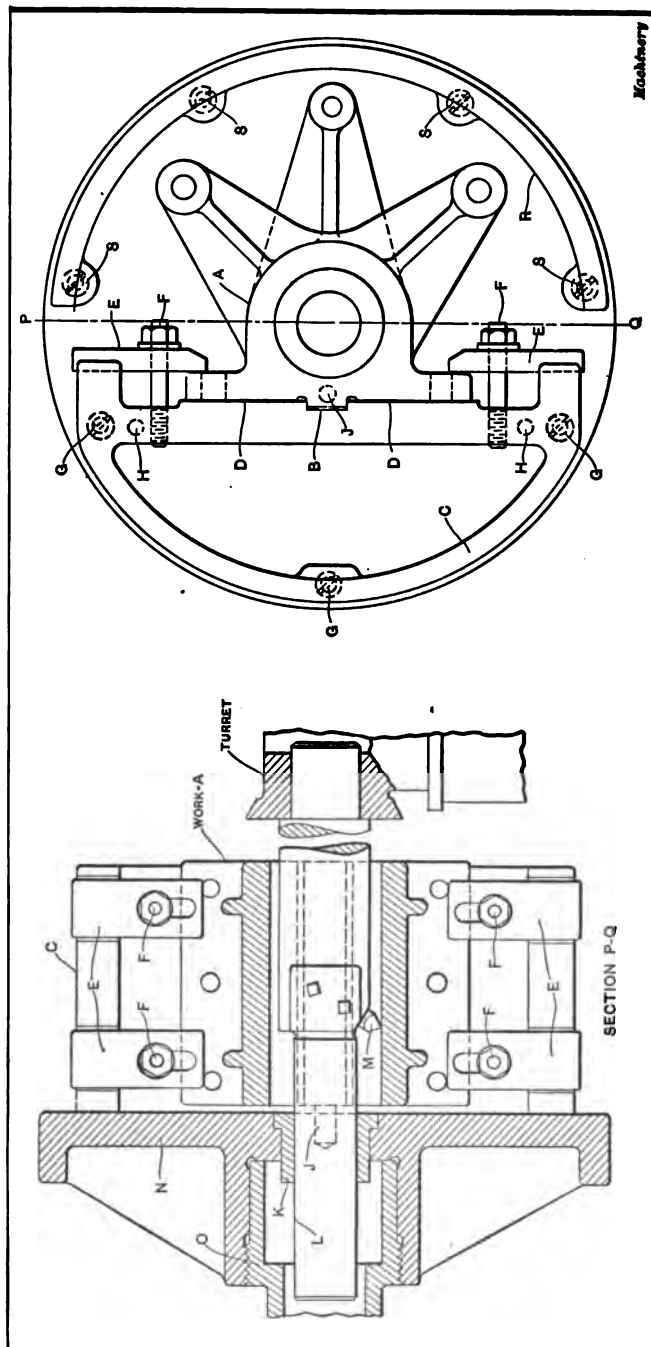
Fixture for Boring Irregular Castings on Horizontal Turret Lathe
